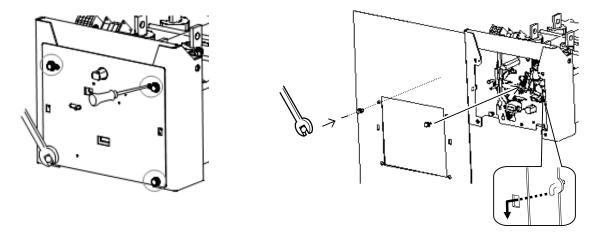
Remove the panel mounting bolts (M8 – 4 bolts and M4 – 2 pan-head screws).
